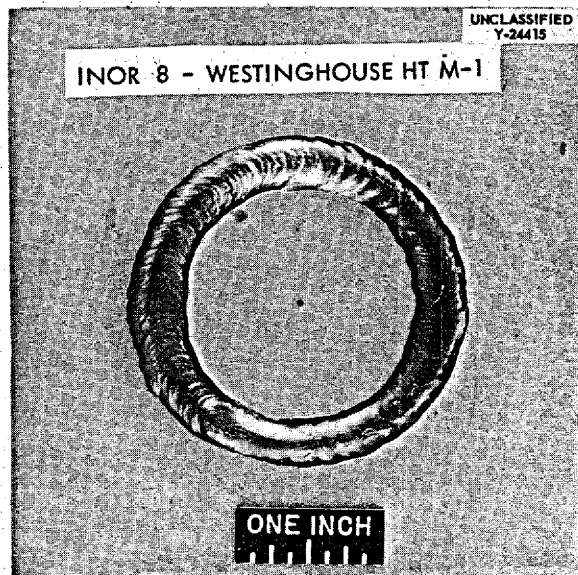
Westinghouse 8M-1 Circular-Groove Weld-Cracking-Test Specimen.
